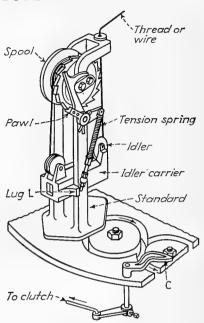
Mechanism used with variations on tubular braiding machines. When braiding, tension on the wire or thread lifts the idler carrier which thereby releases the pawl from the ratchet on spool flange and allows the spool to turn and unwind. When the machine stops, the tension on wire is decreased, allowing the idler carrier to fall so that the pawl can engage the ratchet. If the wire breaks while the machine is running, the unsupported idler carrier falls to the base of the standard, and when the standard arrives at the station in the raceway adjacent to the cam C, the lug L on idler carrier strikes the cam C, rotating it far enough to disengage a clutch on the driving shaft, thereby stopping the machine.
